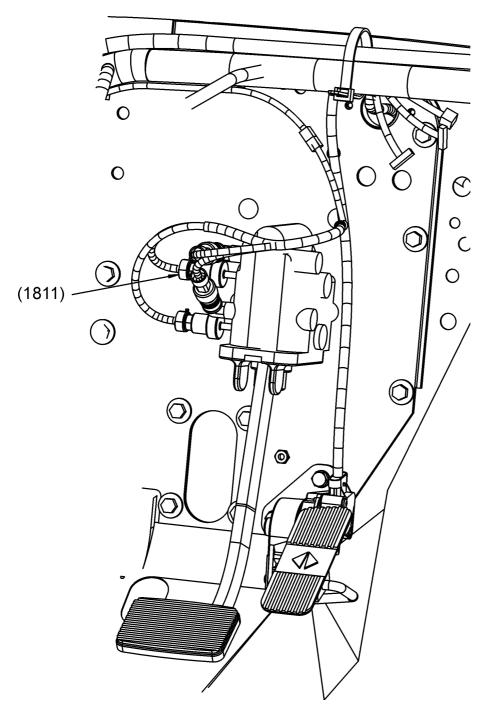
Primary Air Gauge Transducer Location (Steering Column Support View)
